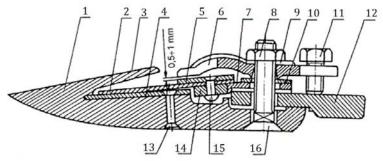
Cross-section of scissors-fingers cutting tool [1]:
